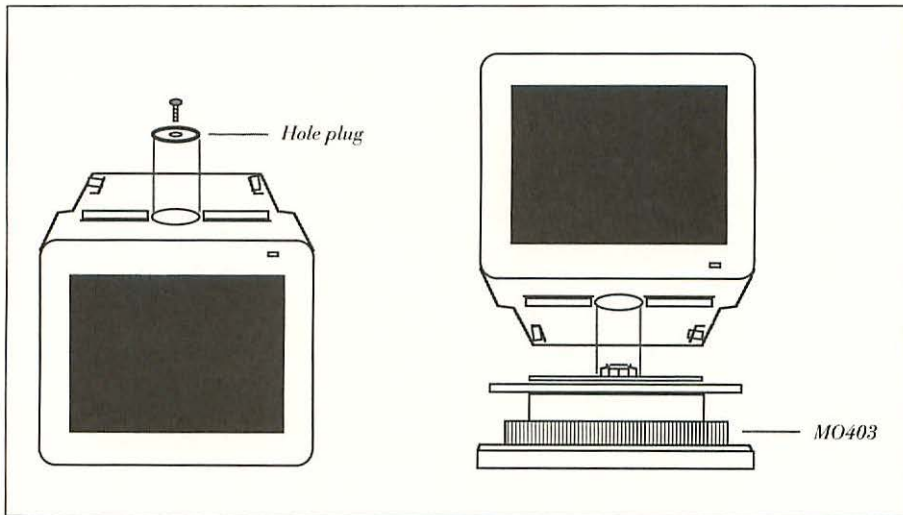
To prepare an Apple monitor for use with an Apple Universal Monitor Stand (MO403), unscrew the hole plug using a Phillips-head screwdriver.
